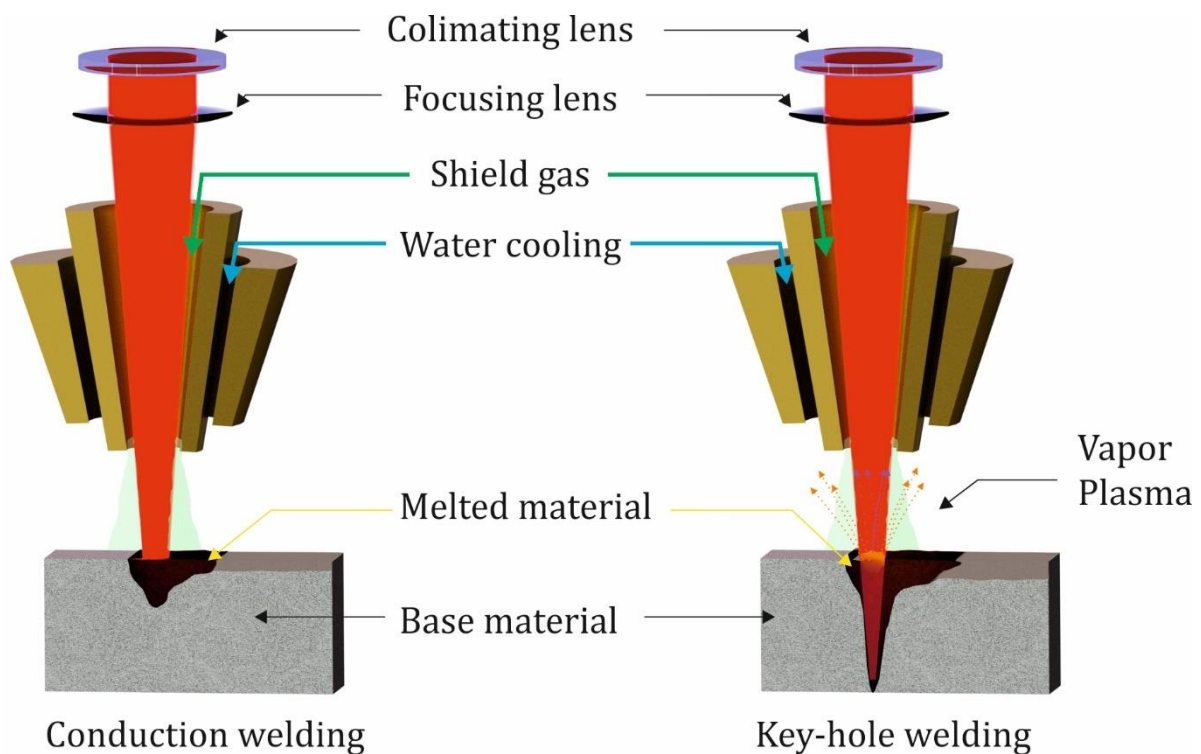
3D representation of the laser welding process in a) conduction mode and b) key-hole mode.
